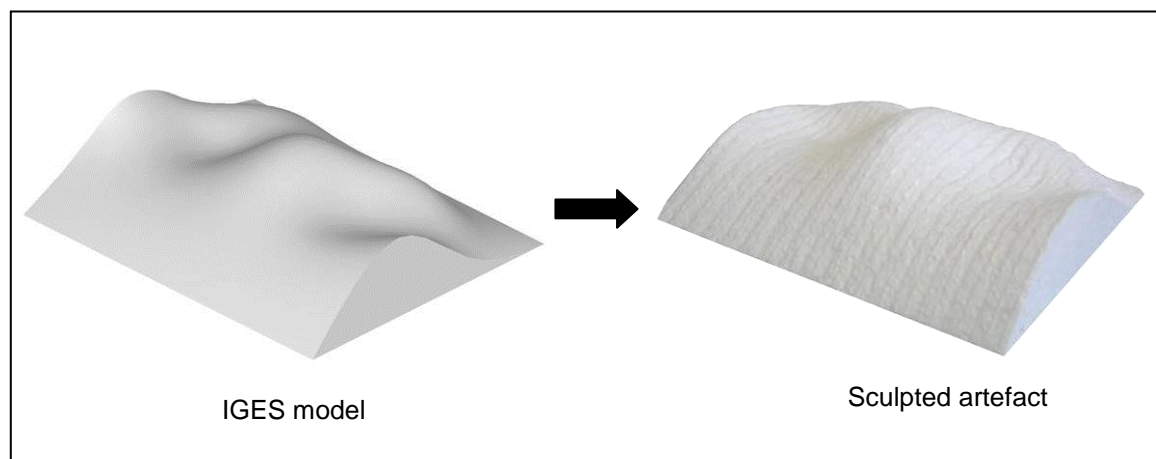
IGES model and part sculpted from EPS showing complex 3D surfaces produced with the FAST system.
